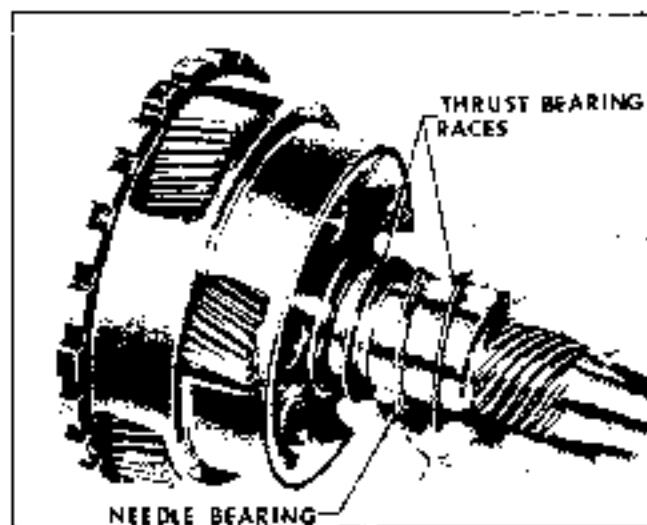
F-92 Installing Planet Carrier Thrust Bearing and Races
